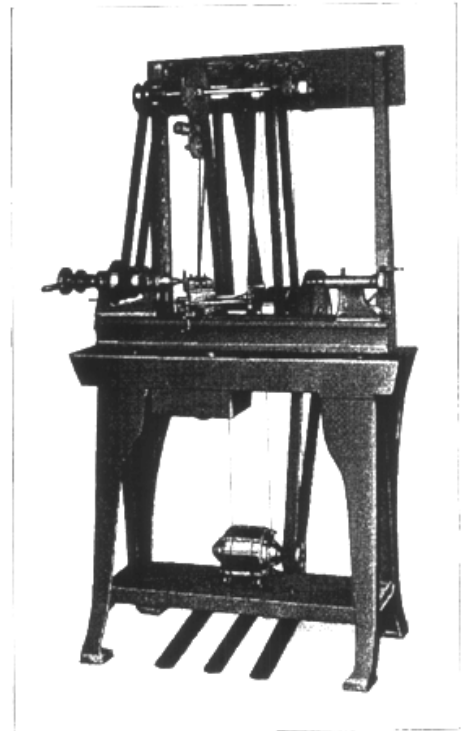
Rivett Series 507 lathe, external grinding attachment, on Oil Pan and Floor Legs with Countershaft Plank Supports, Jackshaft with Plank, Wall Countershaft with Grinding Countershaft Attachment, ball-bearing, Motor Plank on Floor Legs and Plain Foot Treadles
